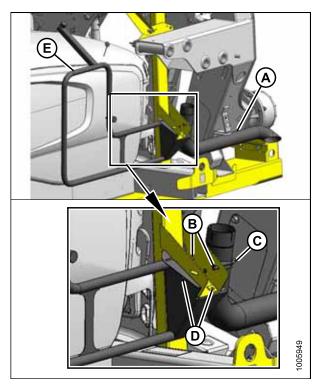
Hand Rails and Exhaust Stack Shipping Position
